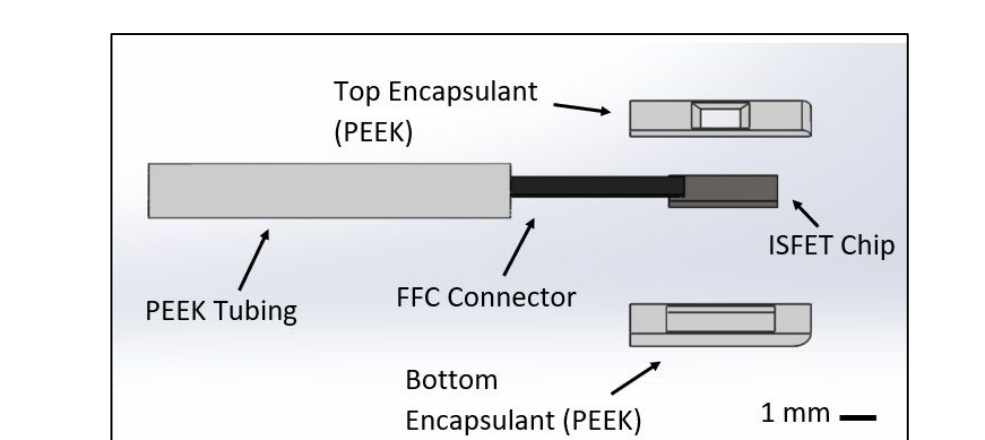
Solidworks model showing exploded view of encapsulated ISFET design. ISFET chip is held in place with epoxy and connected to a main circuit via an FFC cable.
